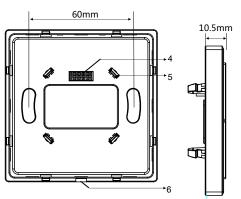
Dimensions - Back View Figure 6. Dimensions - Side View
